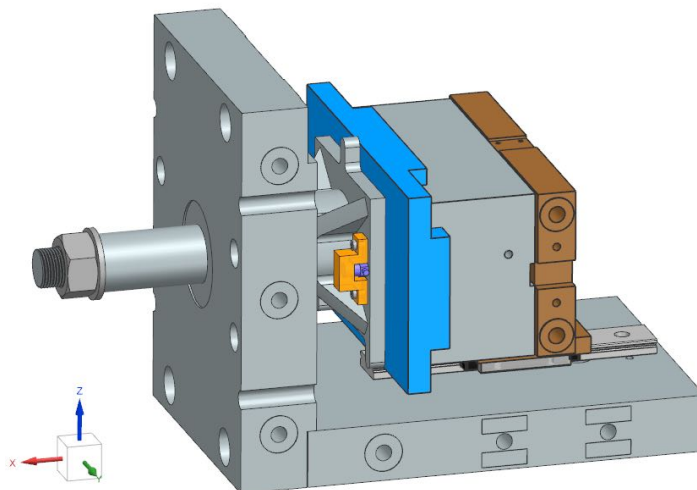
Alignment between the stator core and the target plate, using a 3D-printed tool (shown in blue).
